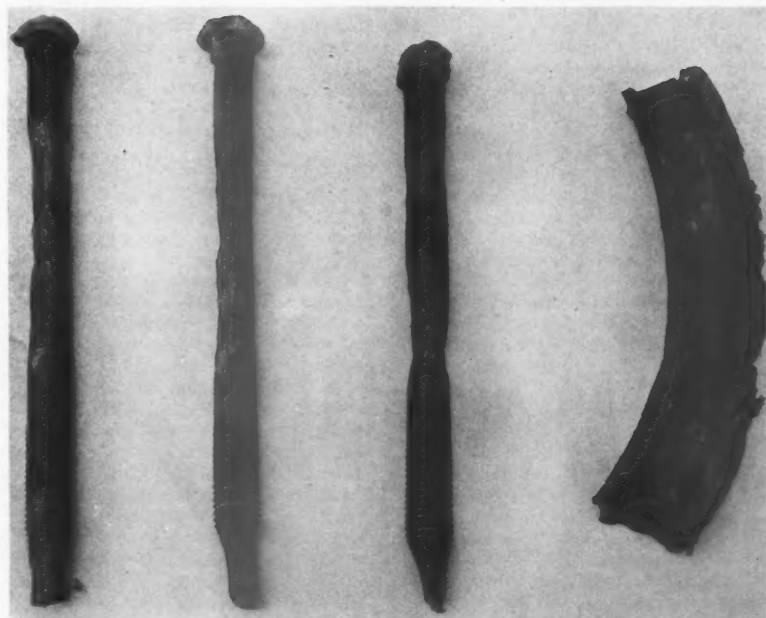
Bolts and section of rubber gasket removed October, 1934, from a 30" leak clamp installed September, 1905
